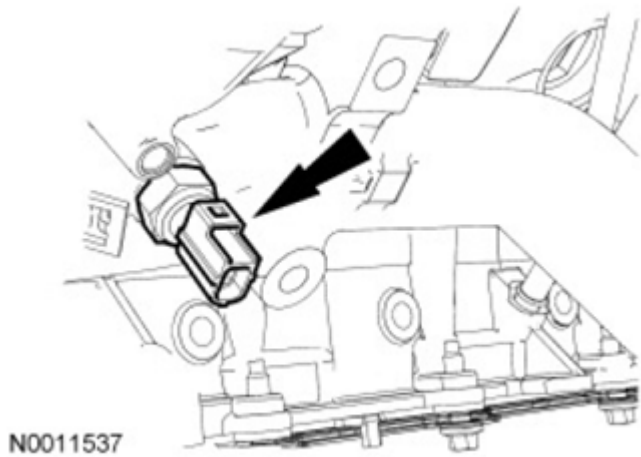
Locating Engine Oil Pressure Switch Electrical Connector
